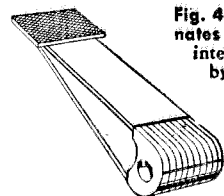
Saves 73%, Eliminates Broaching. Hub with integral key is produced by stacking stampings in assembly. Arm is 10 gauge, brake formed and welded to hub. Cost is only 31¢. Weighs 2.2 pounds.
